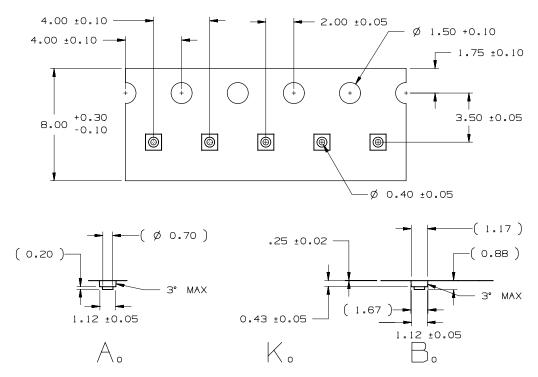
Pocket tape dimensions for LUXEON UV FC1.
